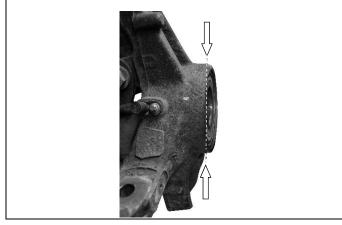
Install wheel bearing. Safety ring properly engaged.
